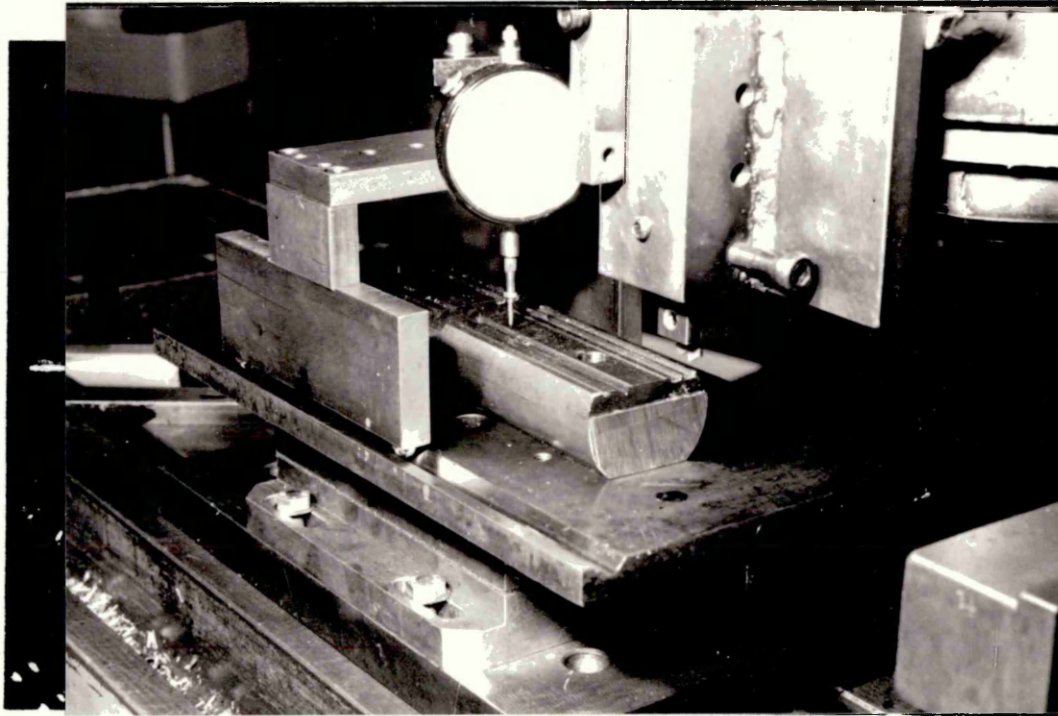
Close up of Bridge and D.T.I. arrangement, for measurement of undeformed chip thickness.
